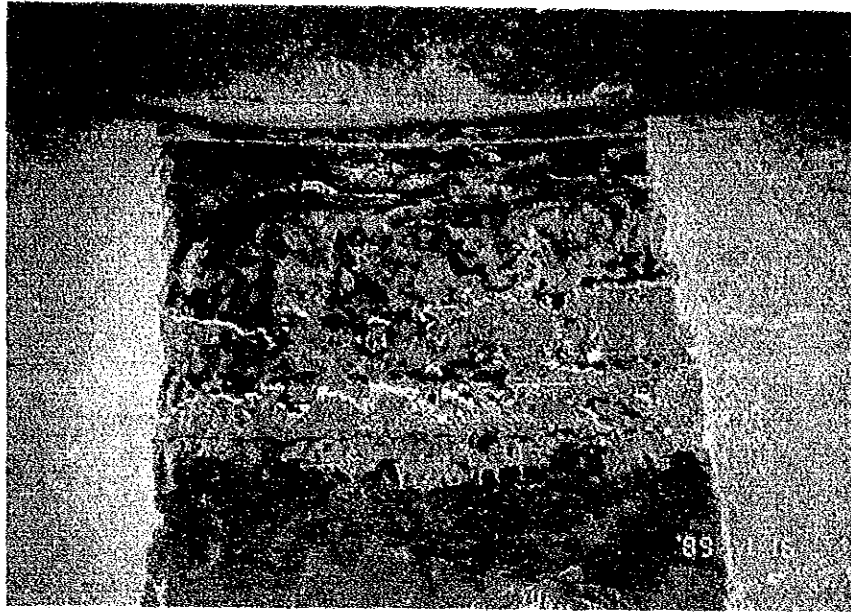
Cavitation Pitting on The Upper Draft Tube Liner just below Runner Outlet, Unit No.3
